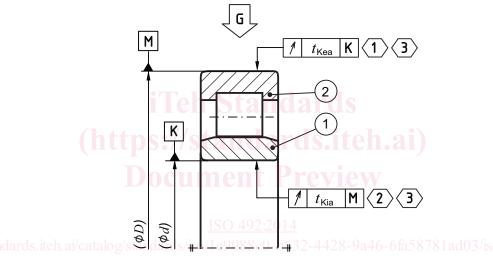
Geometrical tolerances for single components for bearing with cylindrical bore
